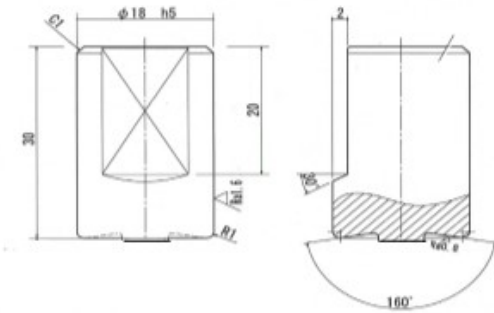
Schematics and dimensions of the welding tool (the dimensions are given in mm).
